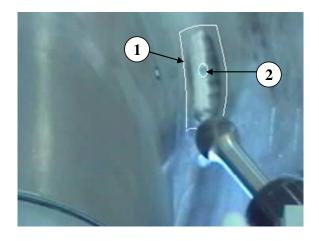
Definition of the grinding area on a mockup CRDM nozzle in the Inetec laboratory. 1 – The grinding area where the grinding tool removes the material, 2 – The surface crack
